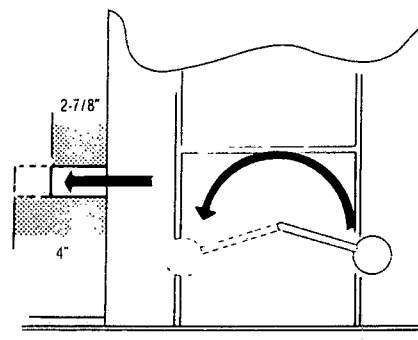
CHECK SHAFT DIMENSIONS OF DIVERTER VALVE.
